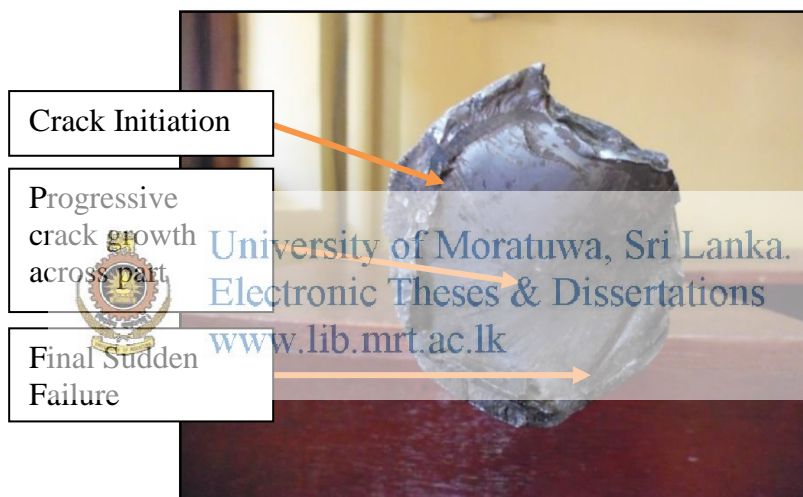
Photograph to show pattern of fracture surface
